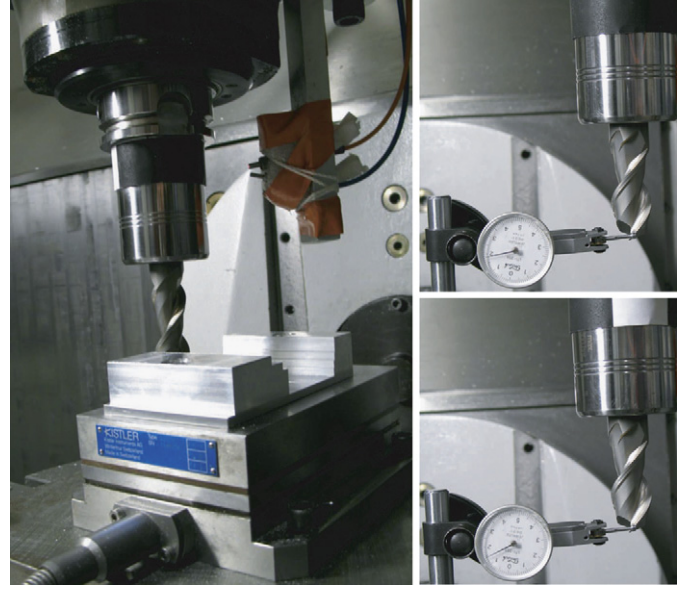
Experimental set-up showing the helical endmill held in a polygonal chuck, the laser tachometer, and the workpiece mounted on the dynamometer (left). Measurement of runout using a dial indicator is also shown (right).
